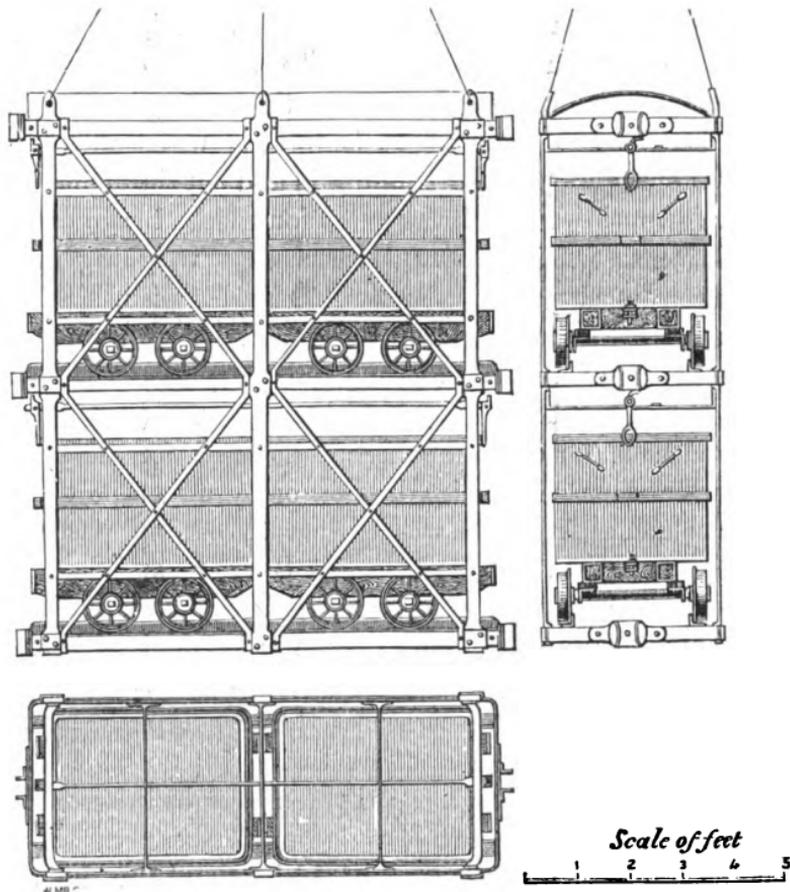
Steel Cage, North Seaton, with four tubs, in elevation and plan.
